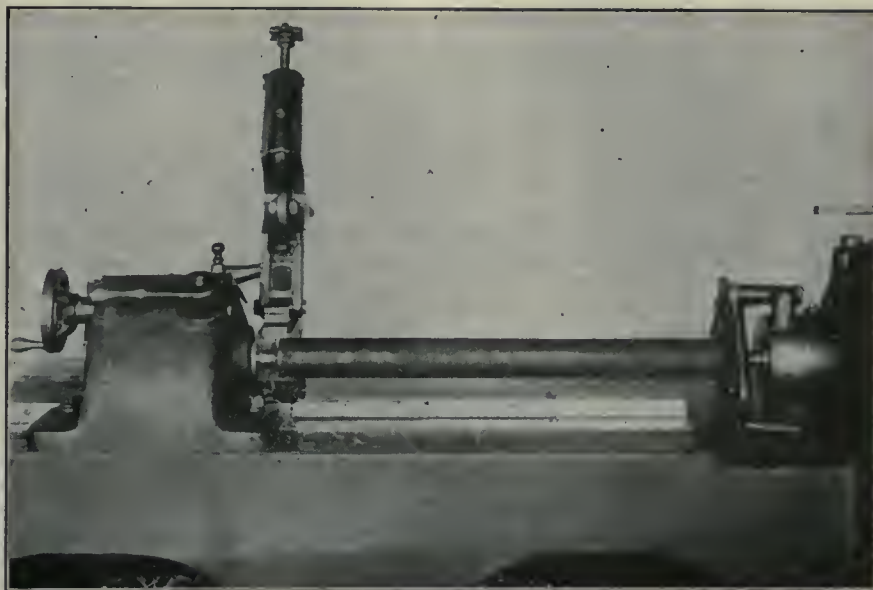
READY TO START CUTTING WITH FIRST TOOL.
